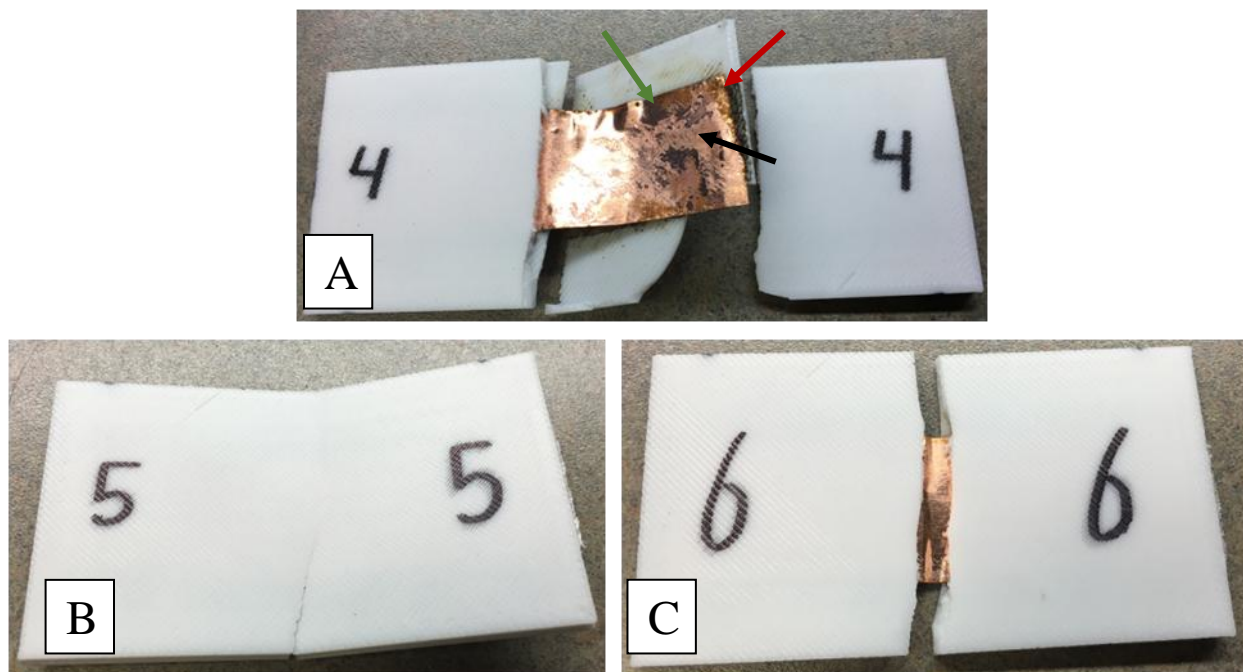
Flexural specimens posttest (12.7 mm foil), A) sample 1, B) sample 2 arrow indicates location of fracture, C) sample 3
